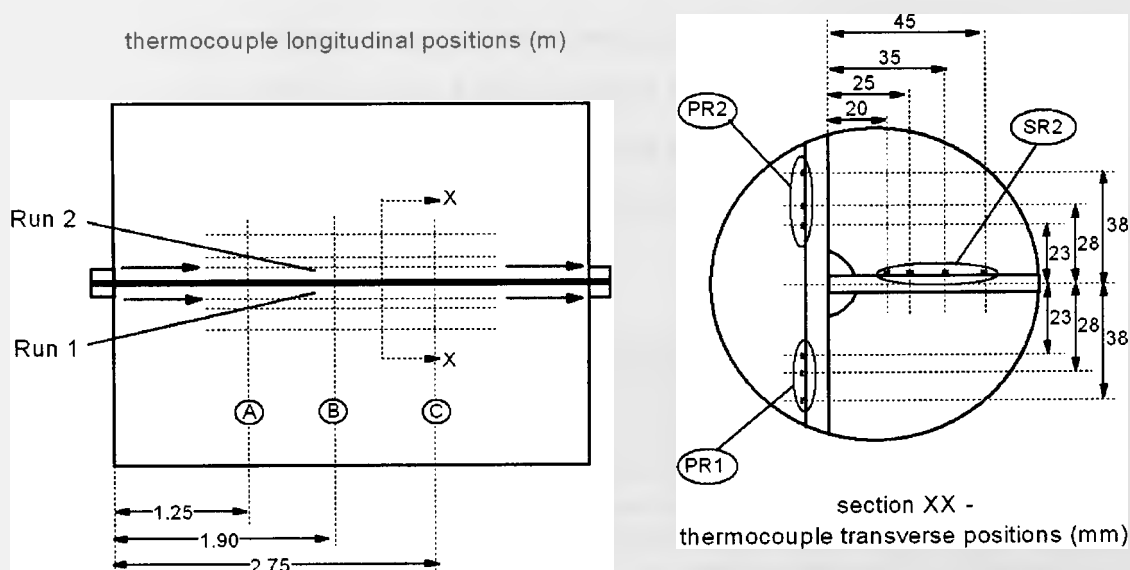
Thermocouple positions of double-sided large plate fillet welding
